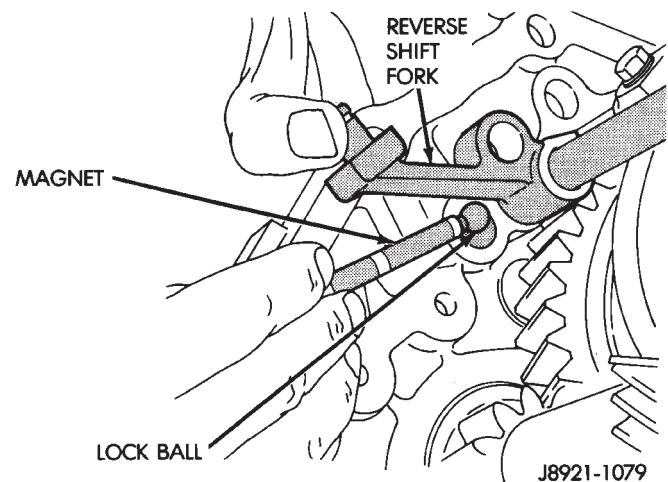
Removing Fifth Gear Shift Rail Lock Ball
